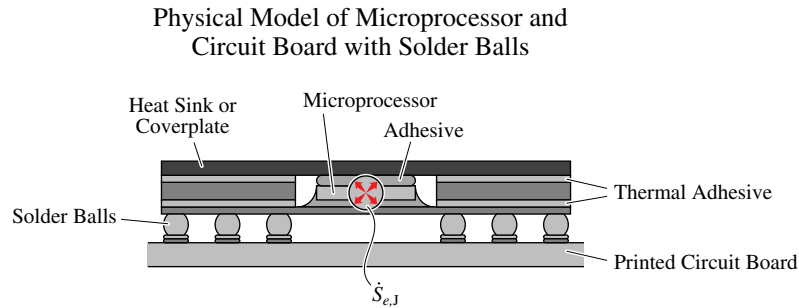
(a) Solder-ball connection of microprocessor to the printed circuit board.
